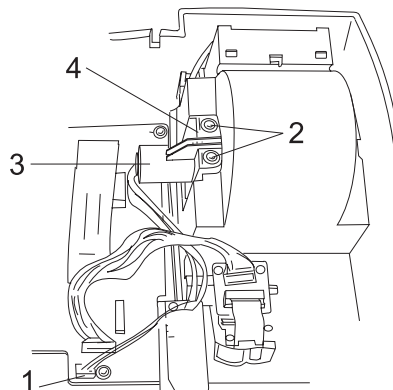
Paper Feed Motor Disassembly/Reassembly
